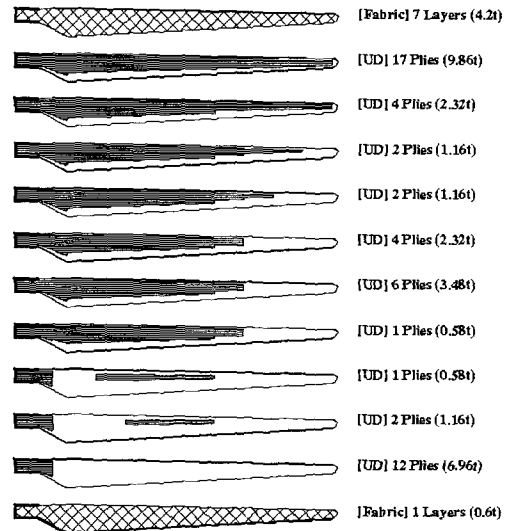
Lay-up sequence for the skin and the spar flange of lower blade part
